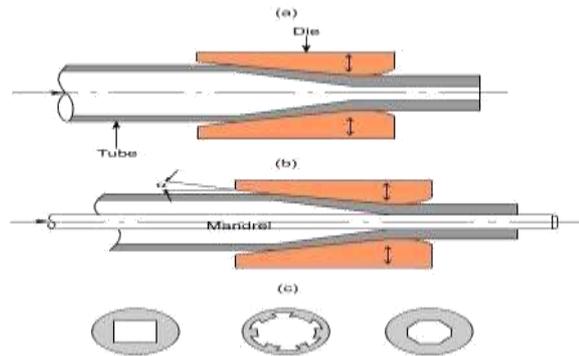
(a) Swaging without a mandrel, (b) Swaging with a mandrel, (c) Different cross-sections obtained by swaging process.
